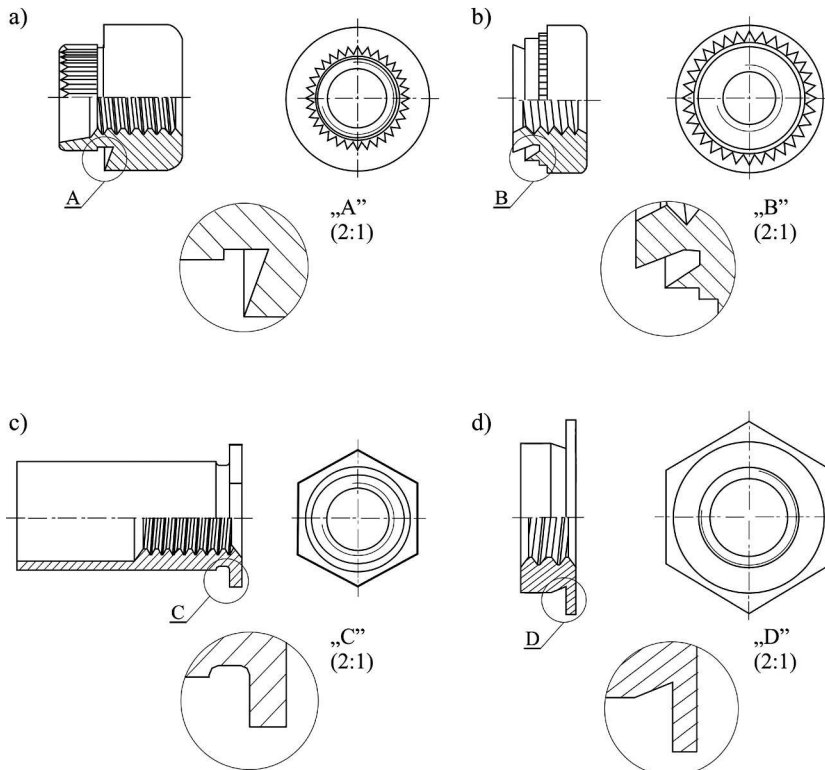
The main solutions of the blind rivet nut pressed in the sheet material
